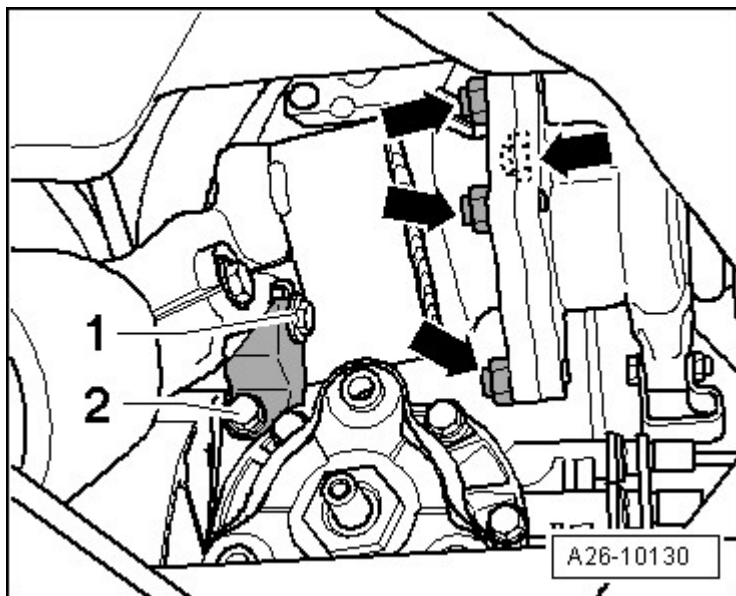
Front Exhaust Pipe With Catalytic Converter Support Bolts And Font Exhaust Nuts
